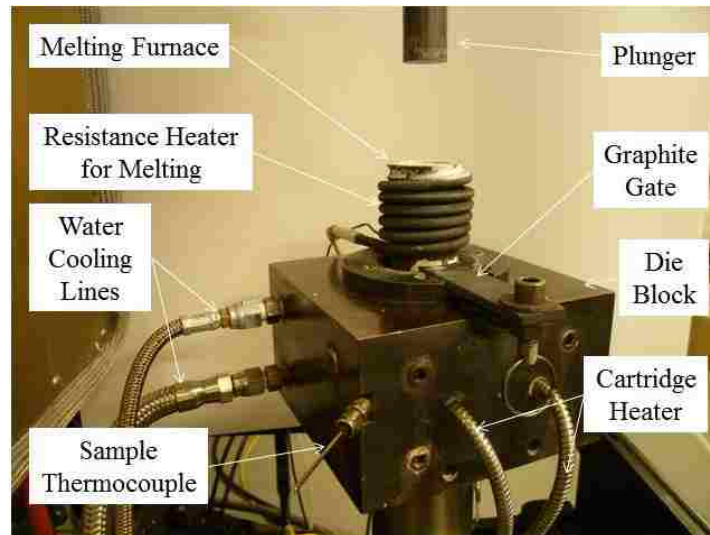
Details of the SC/HPDC UMSA Die assembly.
